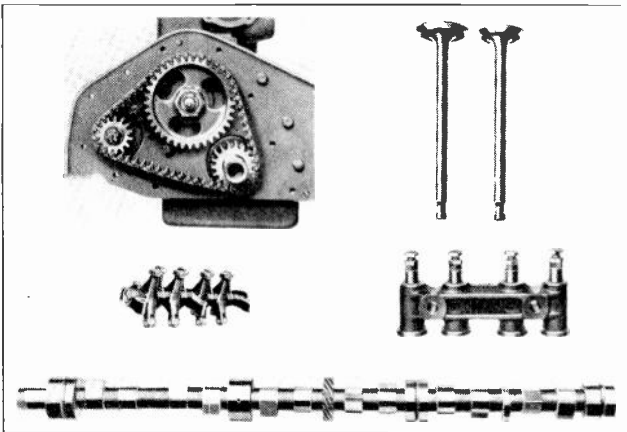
This figure shows valves, push rods, rocker arms, cam shaft and cam shaft drive gears of an automobile engine. Courtesy Oldsmobile Mfg. Co.
